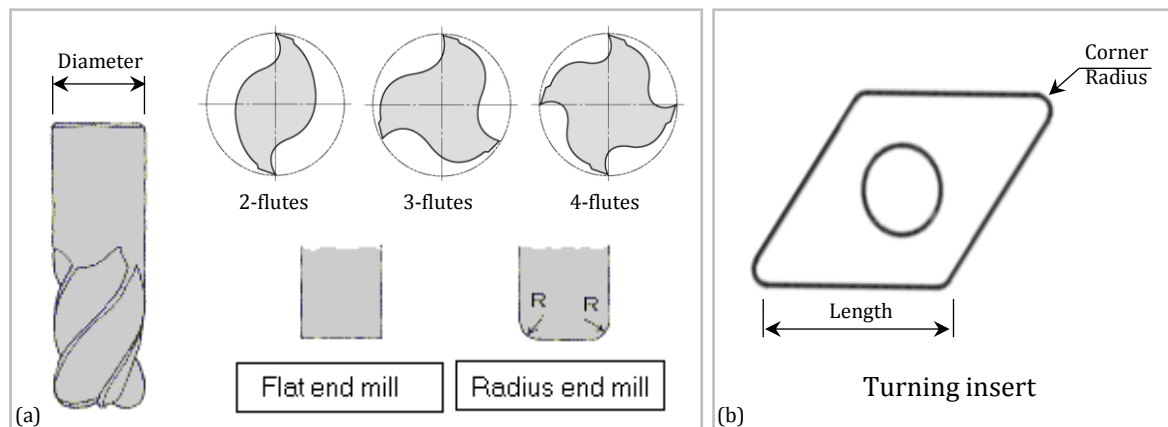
Schematic drawing of (a) an endmill (b) a turning insert
